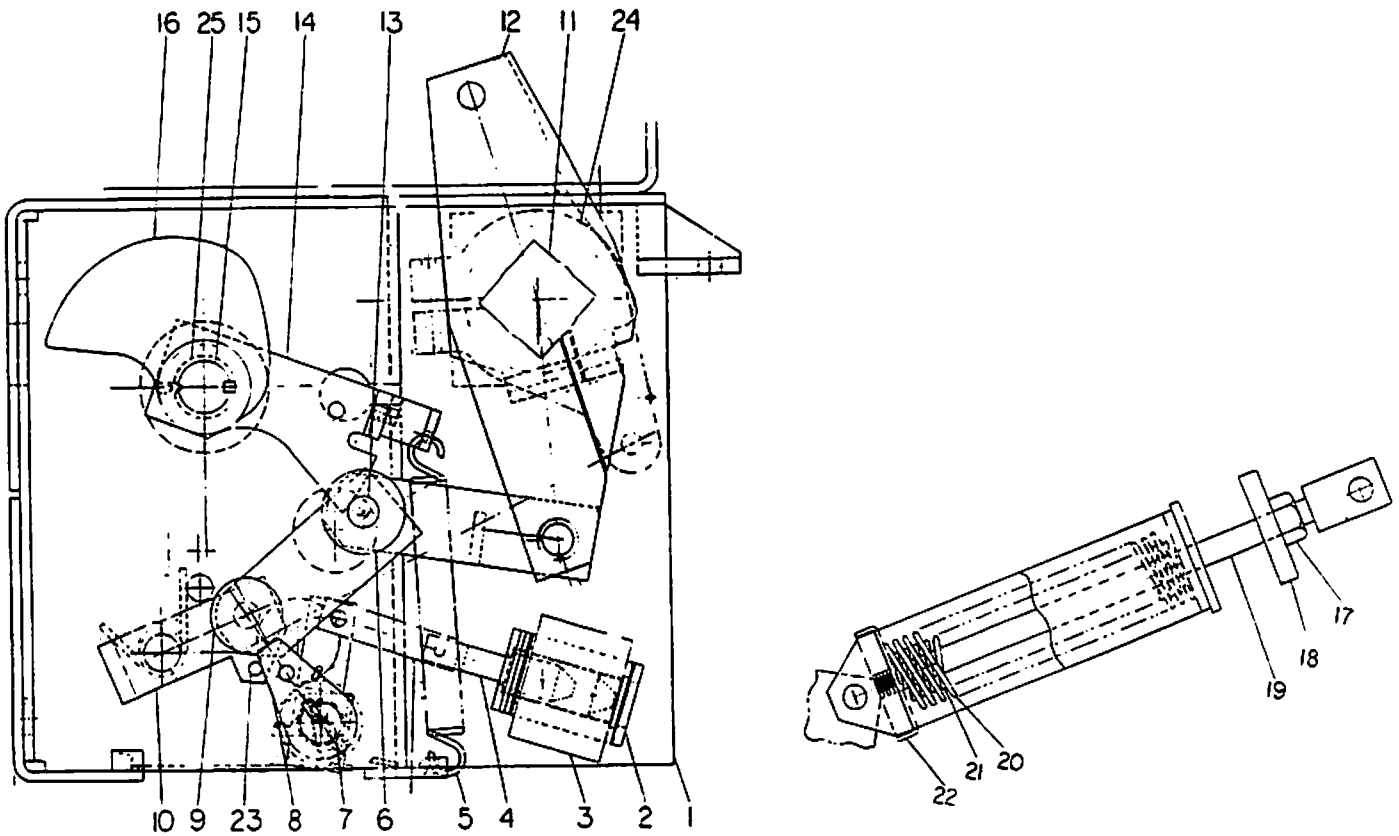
(0121C8152) Sectional Side View of Mechanism
